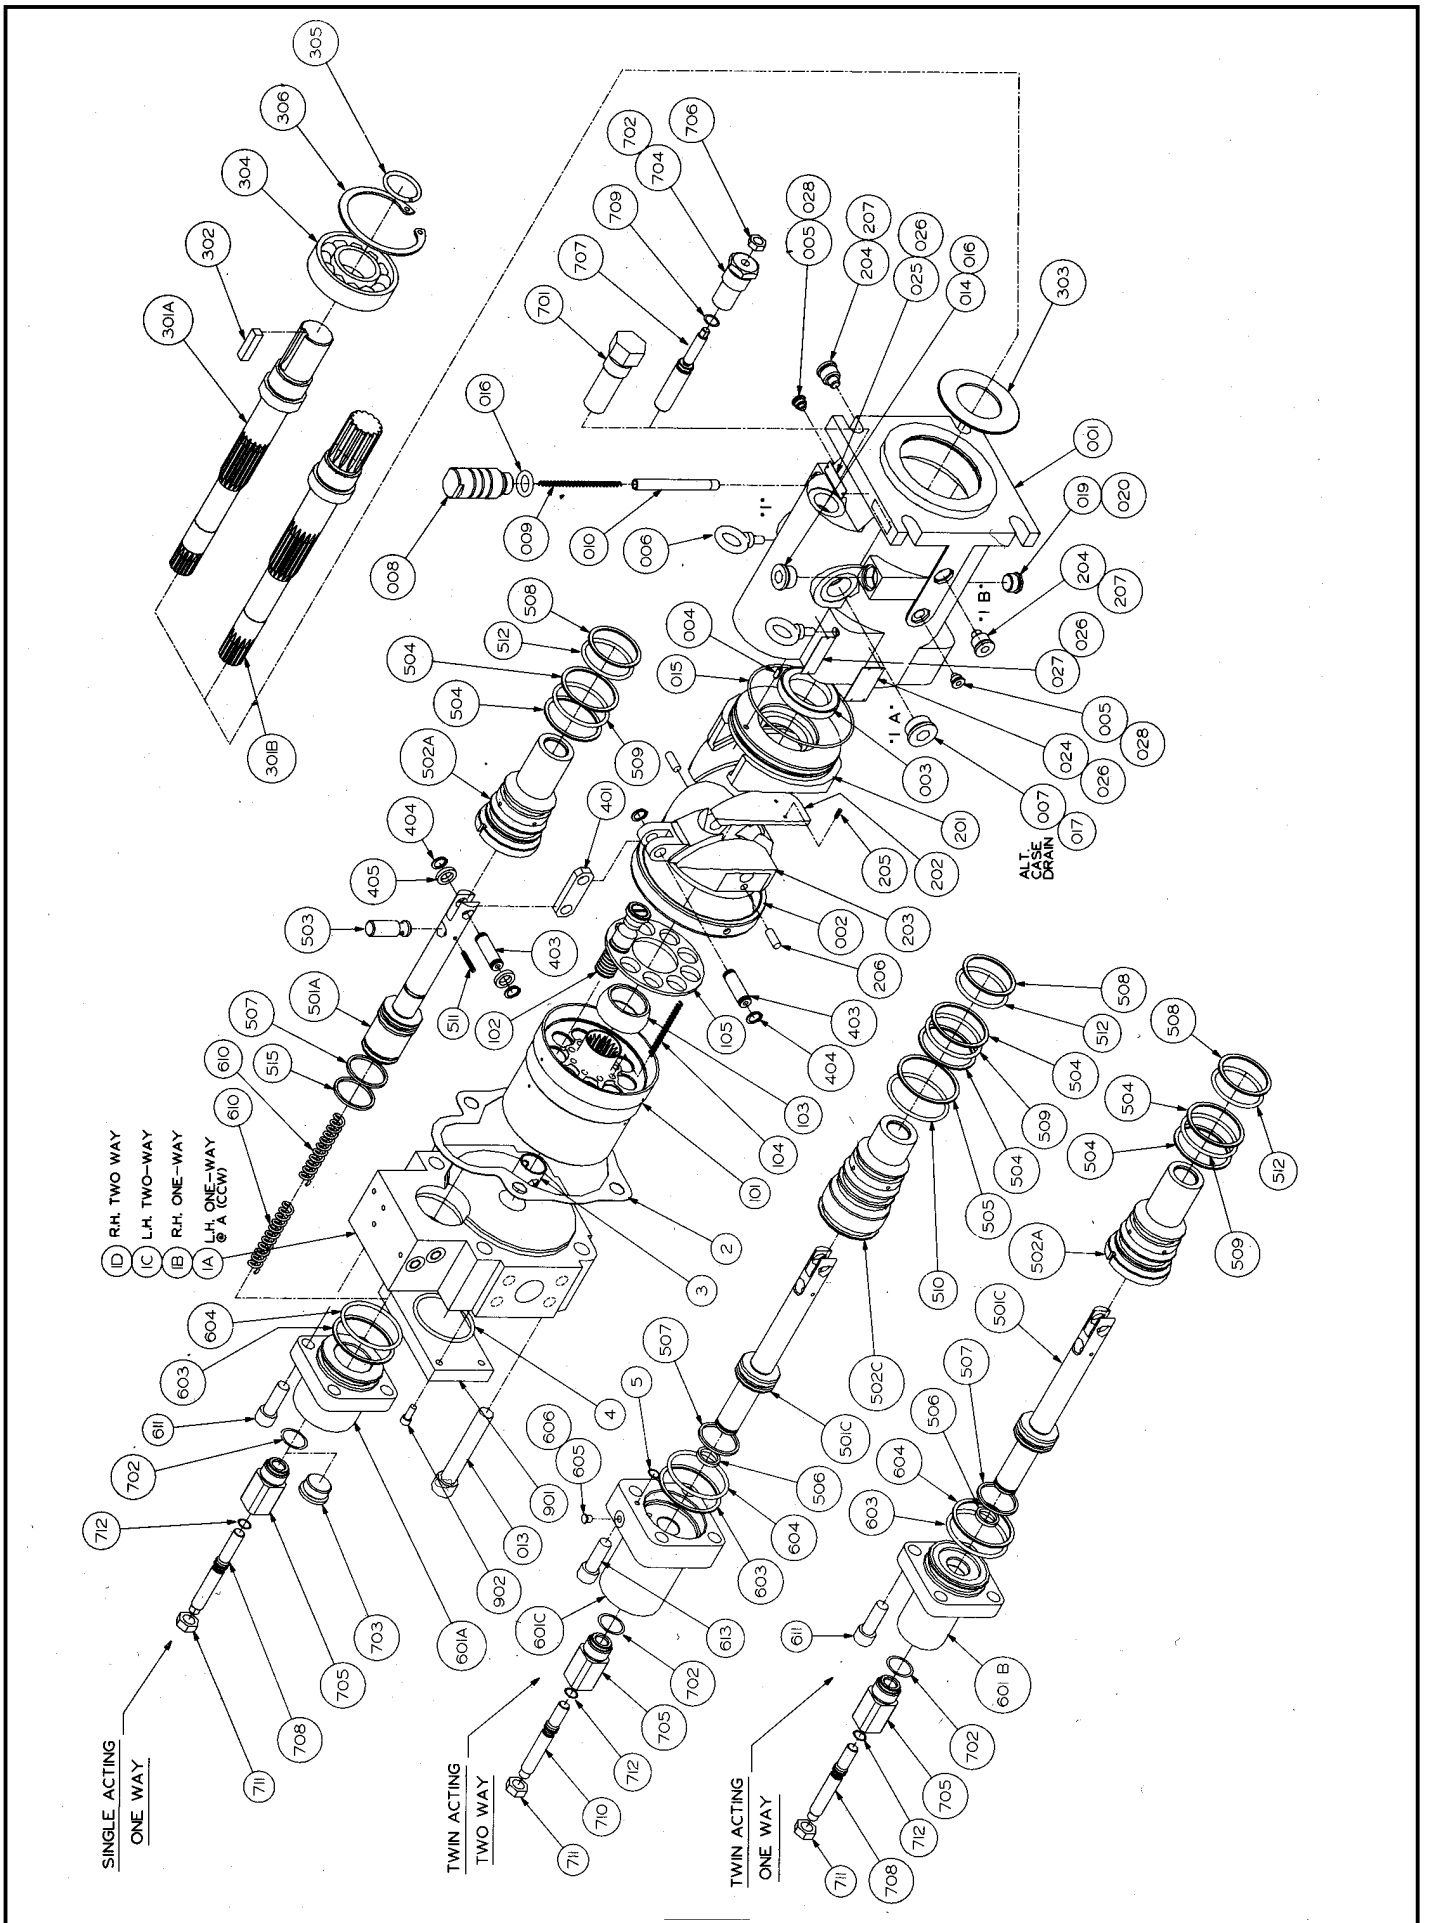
Exploded Parts Drawing, Size 140 (514529-002)
